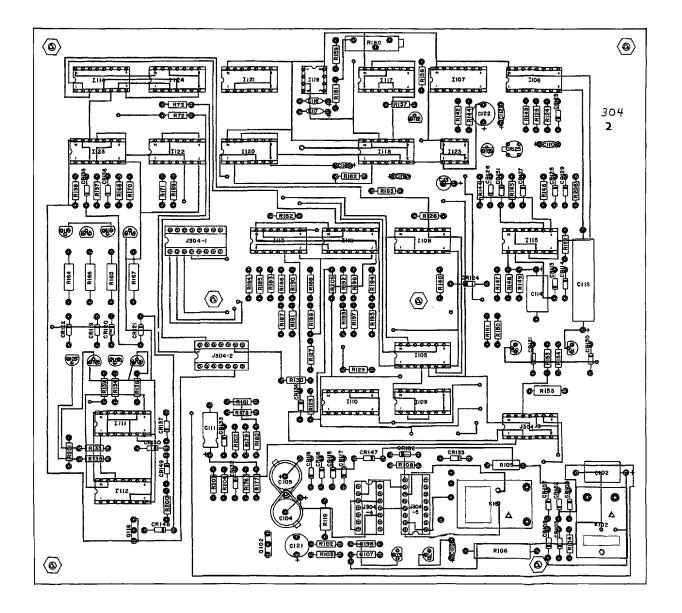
P.C. BOARD ASSEMBLY, BOARD 304, DRAWING
